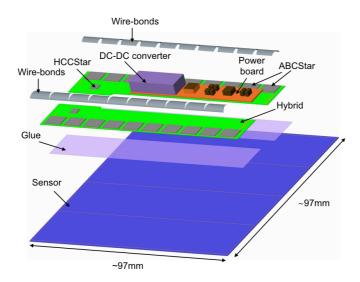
Exploded view of a SS Barrel module with all relevant components. Figure from [10].
